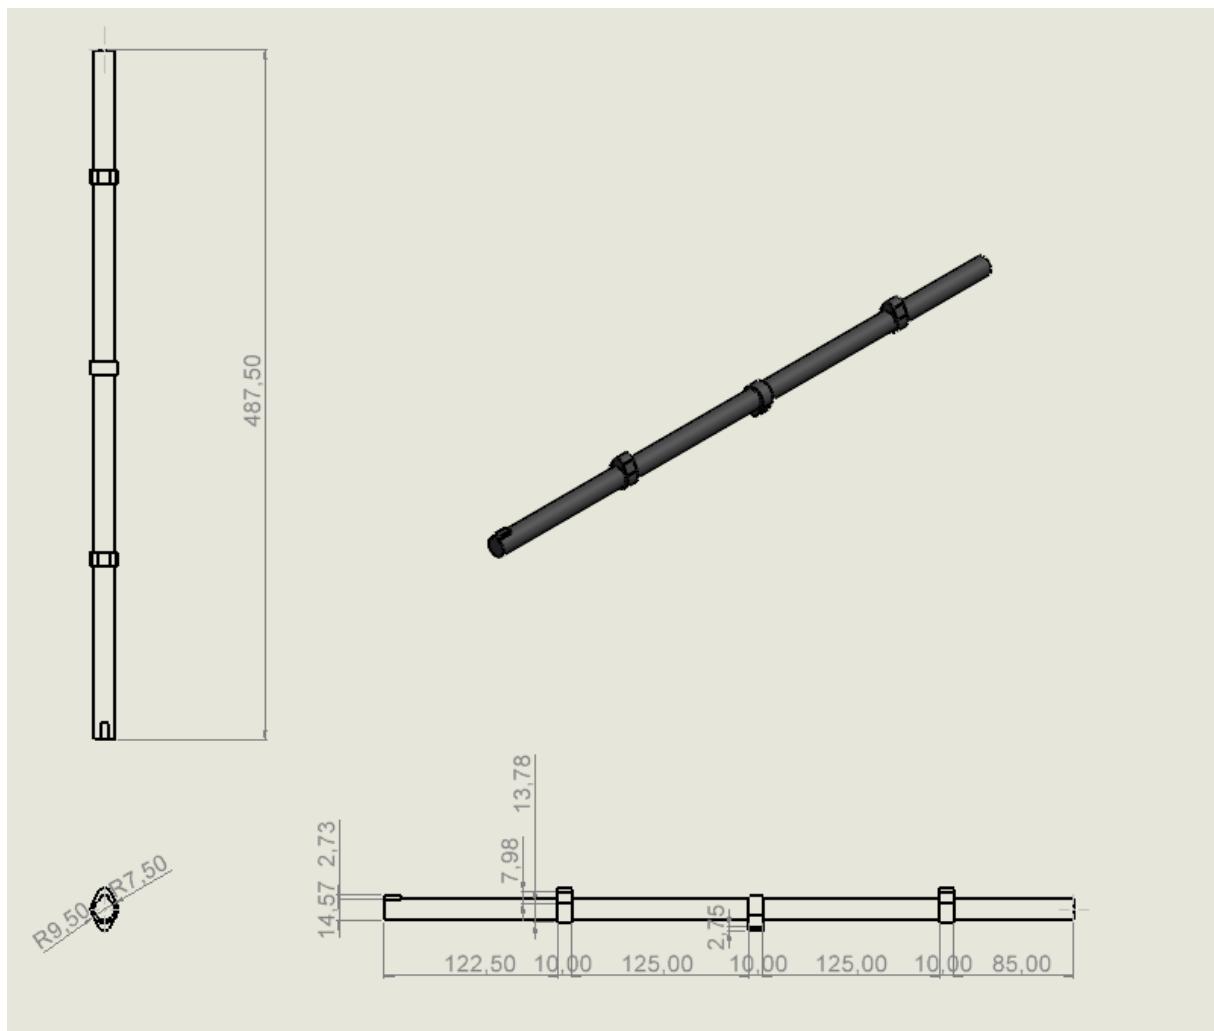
Technical Drawing of Exhaust Valves Camshaft.
